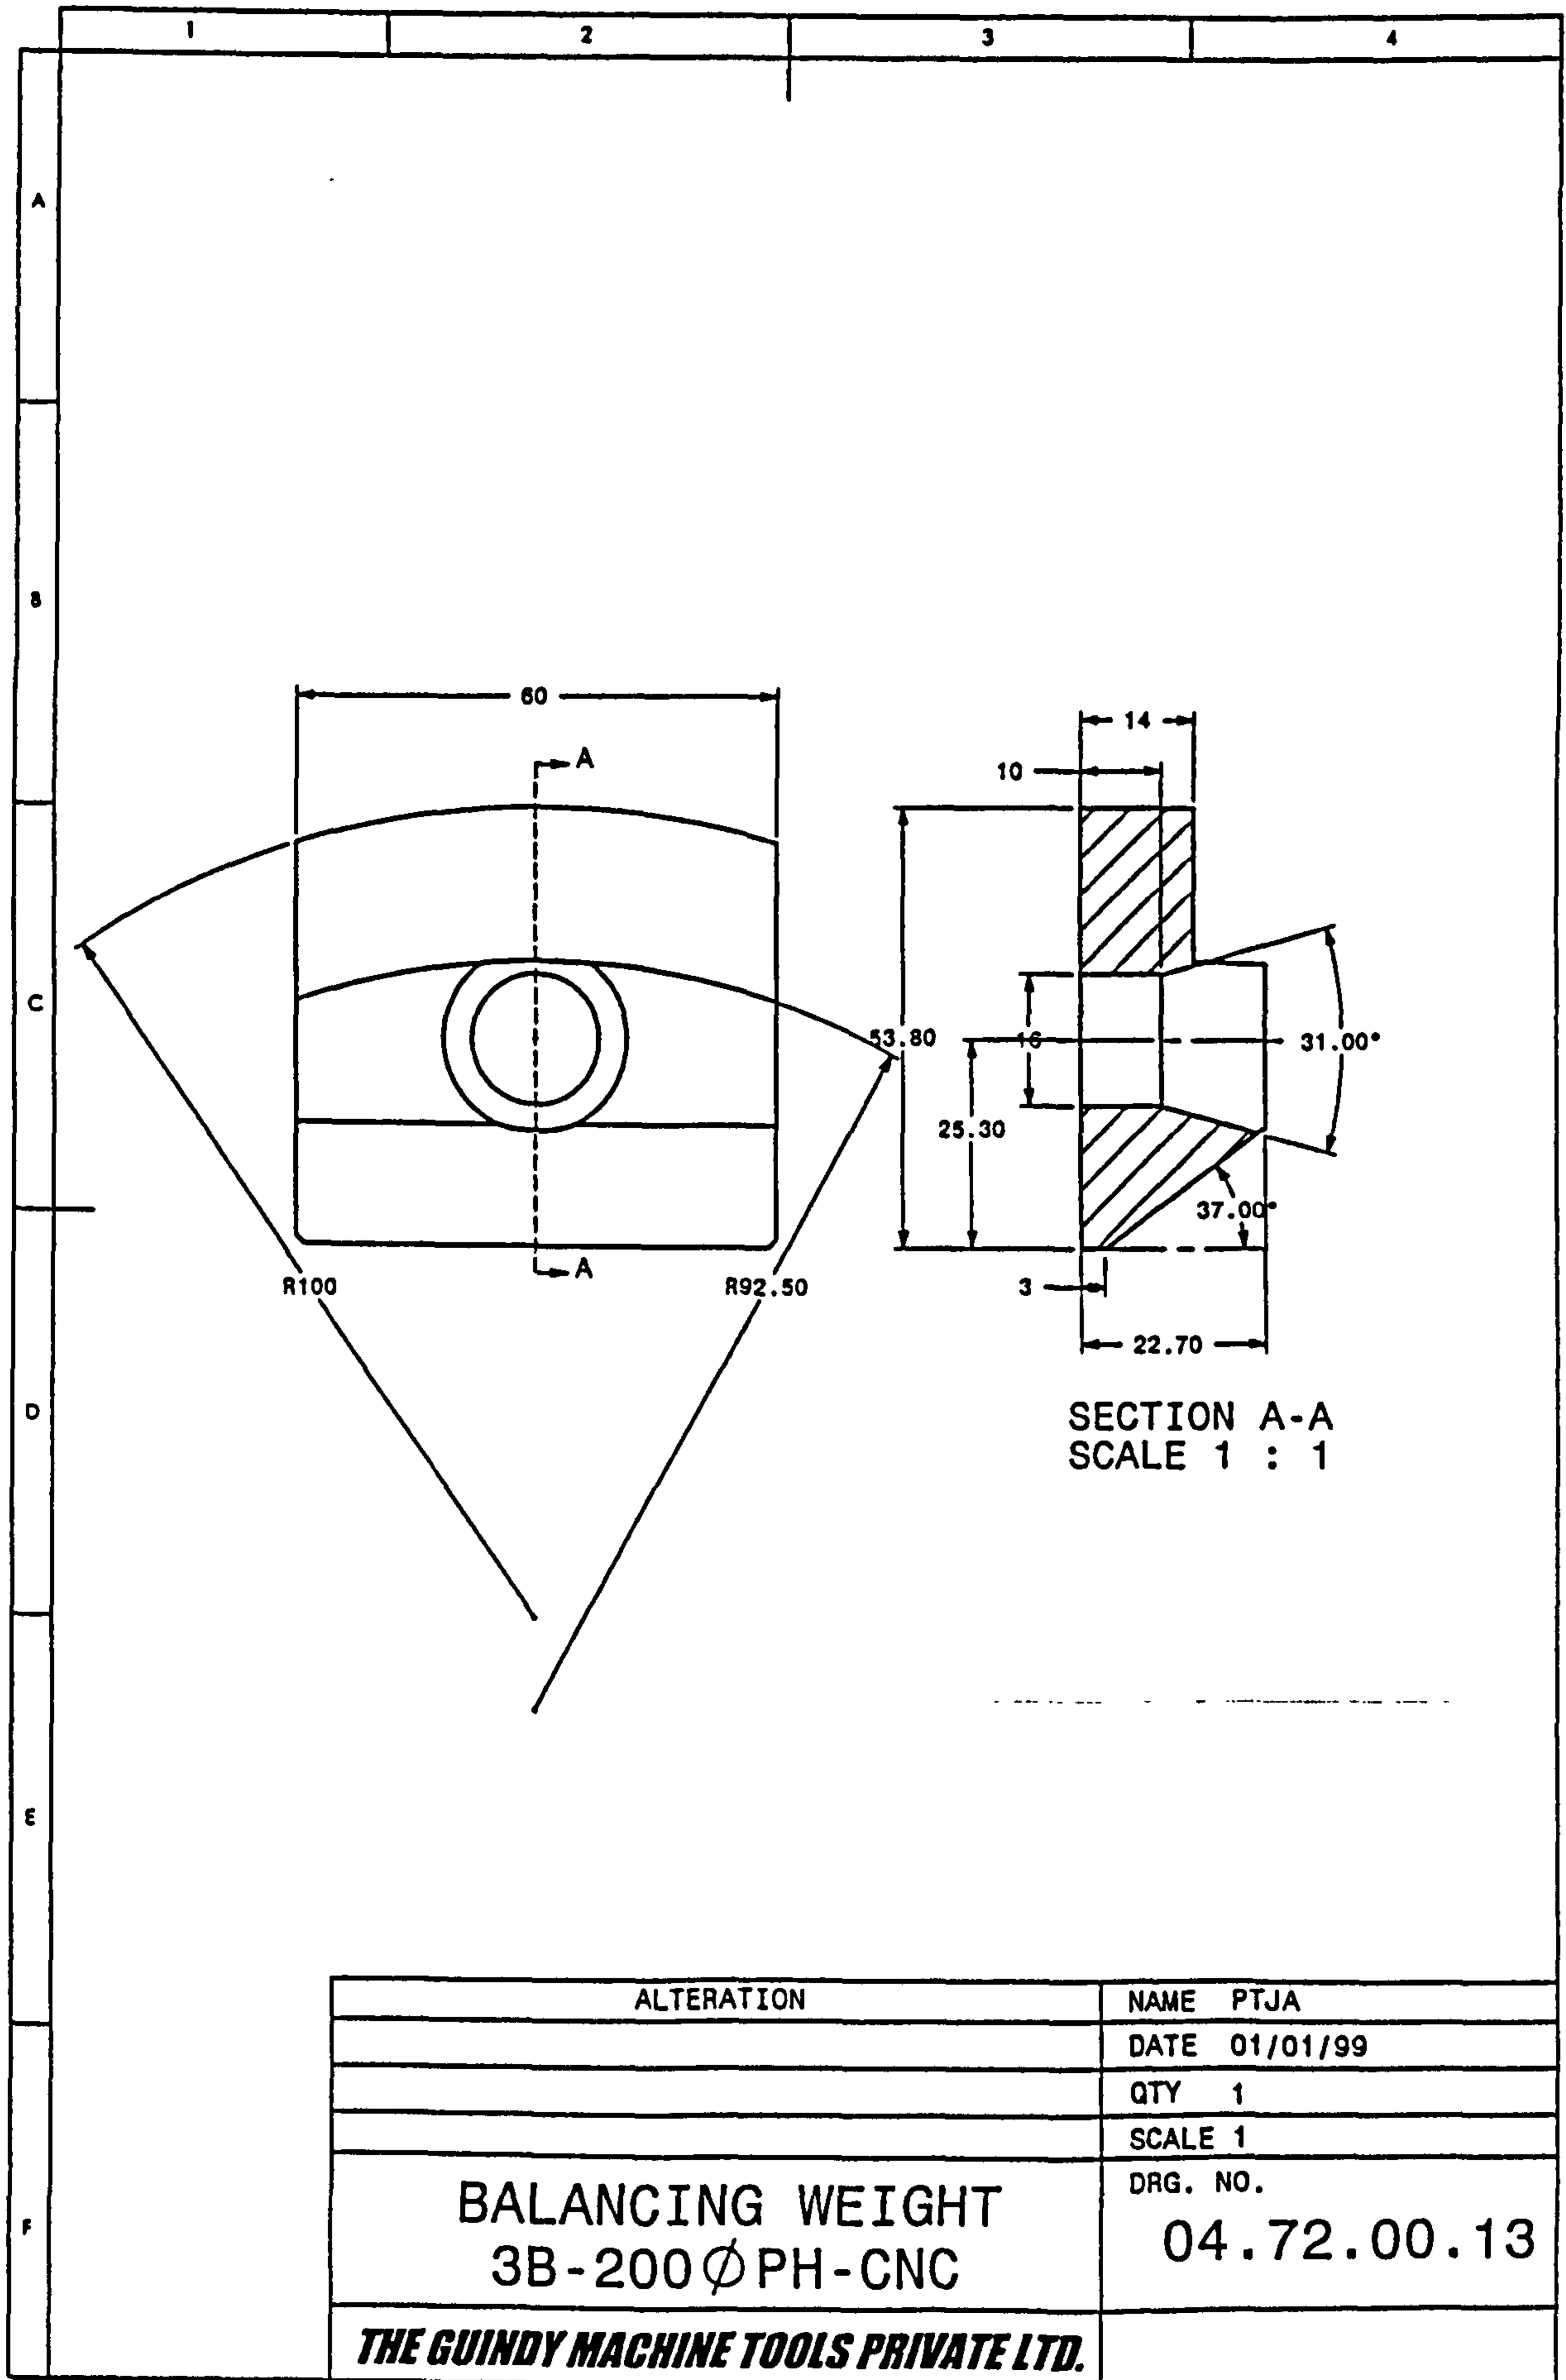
GMT Balancing Weight – Pro/ENGINEER Drawing
